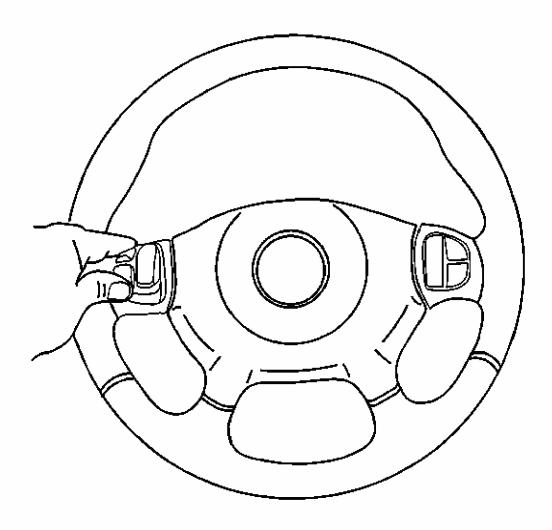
Installing Switch into Steering Wheel Courtesy of GENERAL MOTORS CORP.
